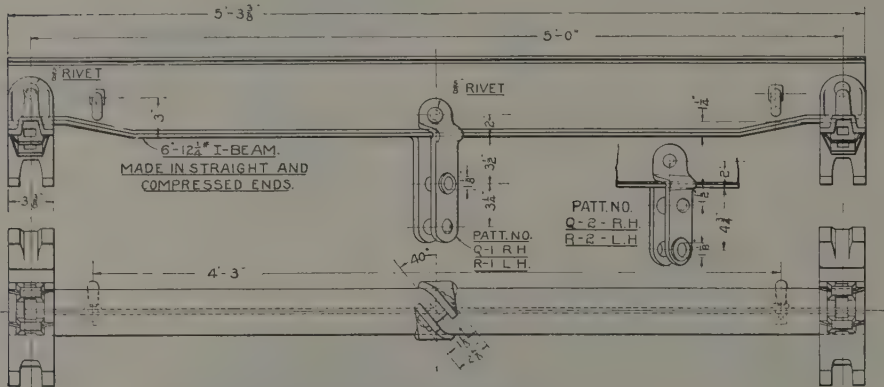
Monarch Solid Compressed End Brake Beam.
